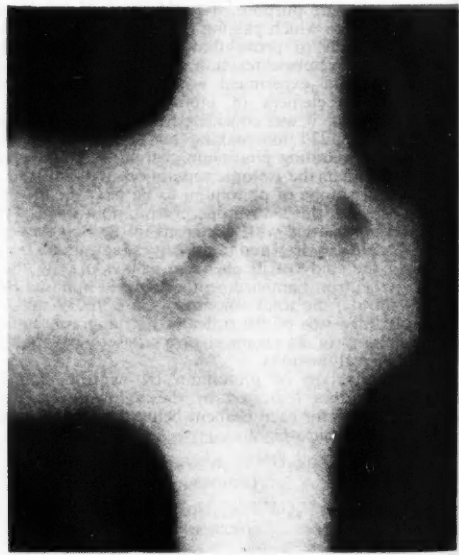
Shows a radiograph of an aluminium alloy casting. The dark patches are caused by cavities in the casting, otherwise impossible to detect without cutting the casting open and thus destroying it. (Victor X-Ray Corporation).
